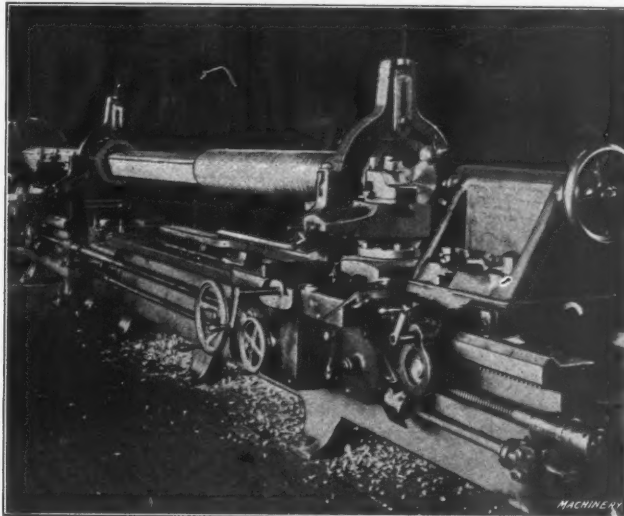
Turning a Special Shaft on Two Pond 36-inch Lathes
